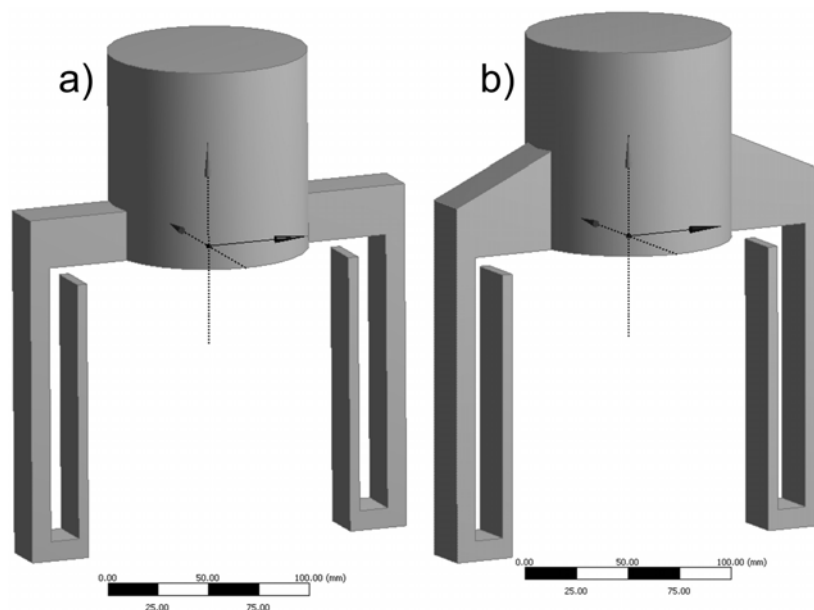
Mould designs for centrifugal casting experiments; a) Mould 1, b) Mould 2
